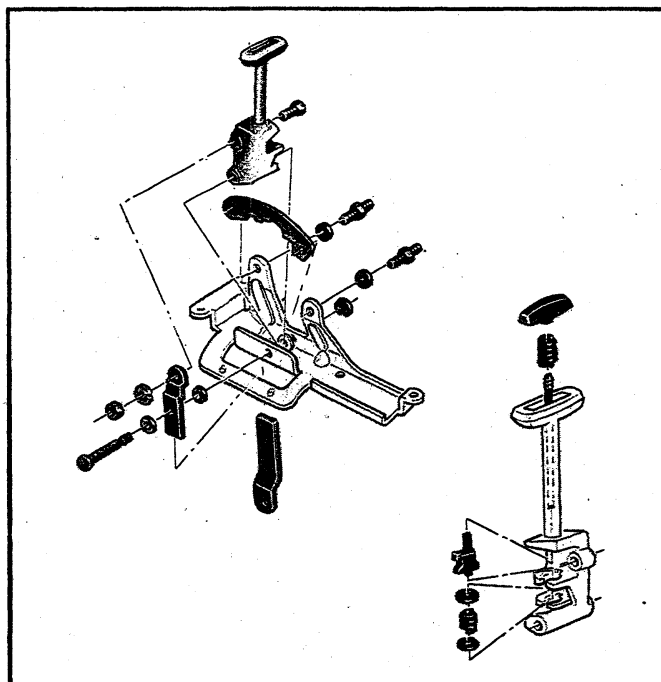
PG - Floor Mounted Control Lever and Bracket Assembly (Chevrolet Shown)
